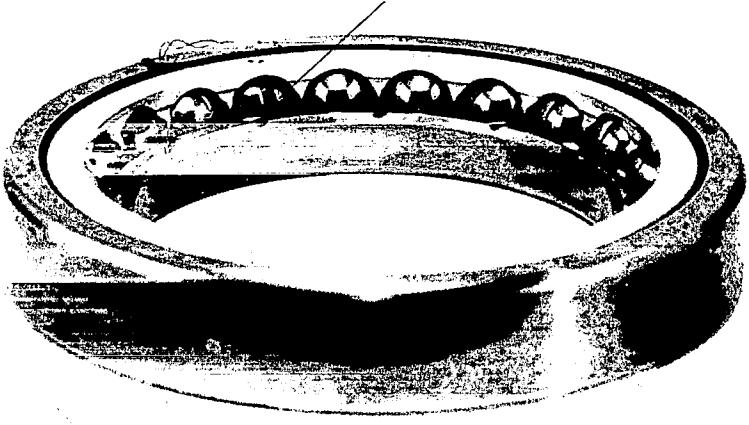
Post-Test Appearance of Drilled-Ball Bearing S/N 2600A-1 Before Disassembly
